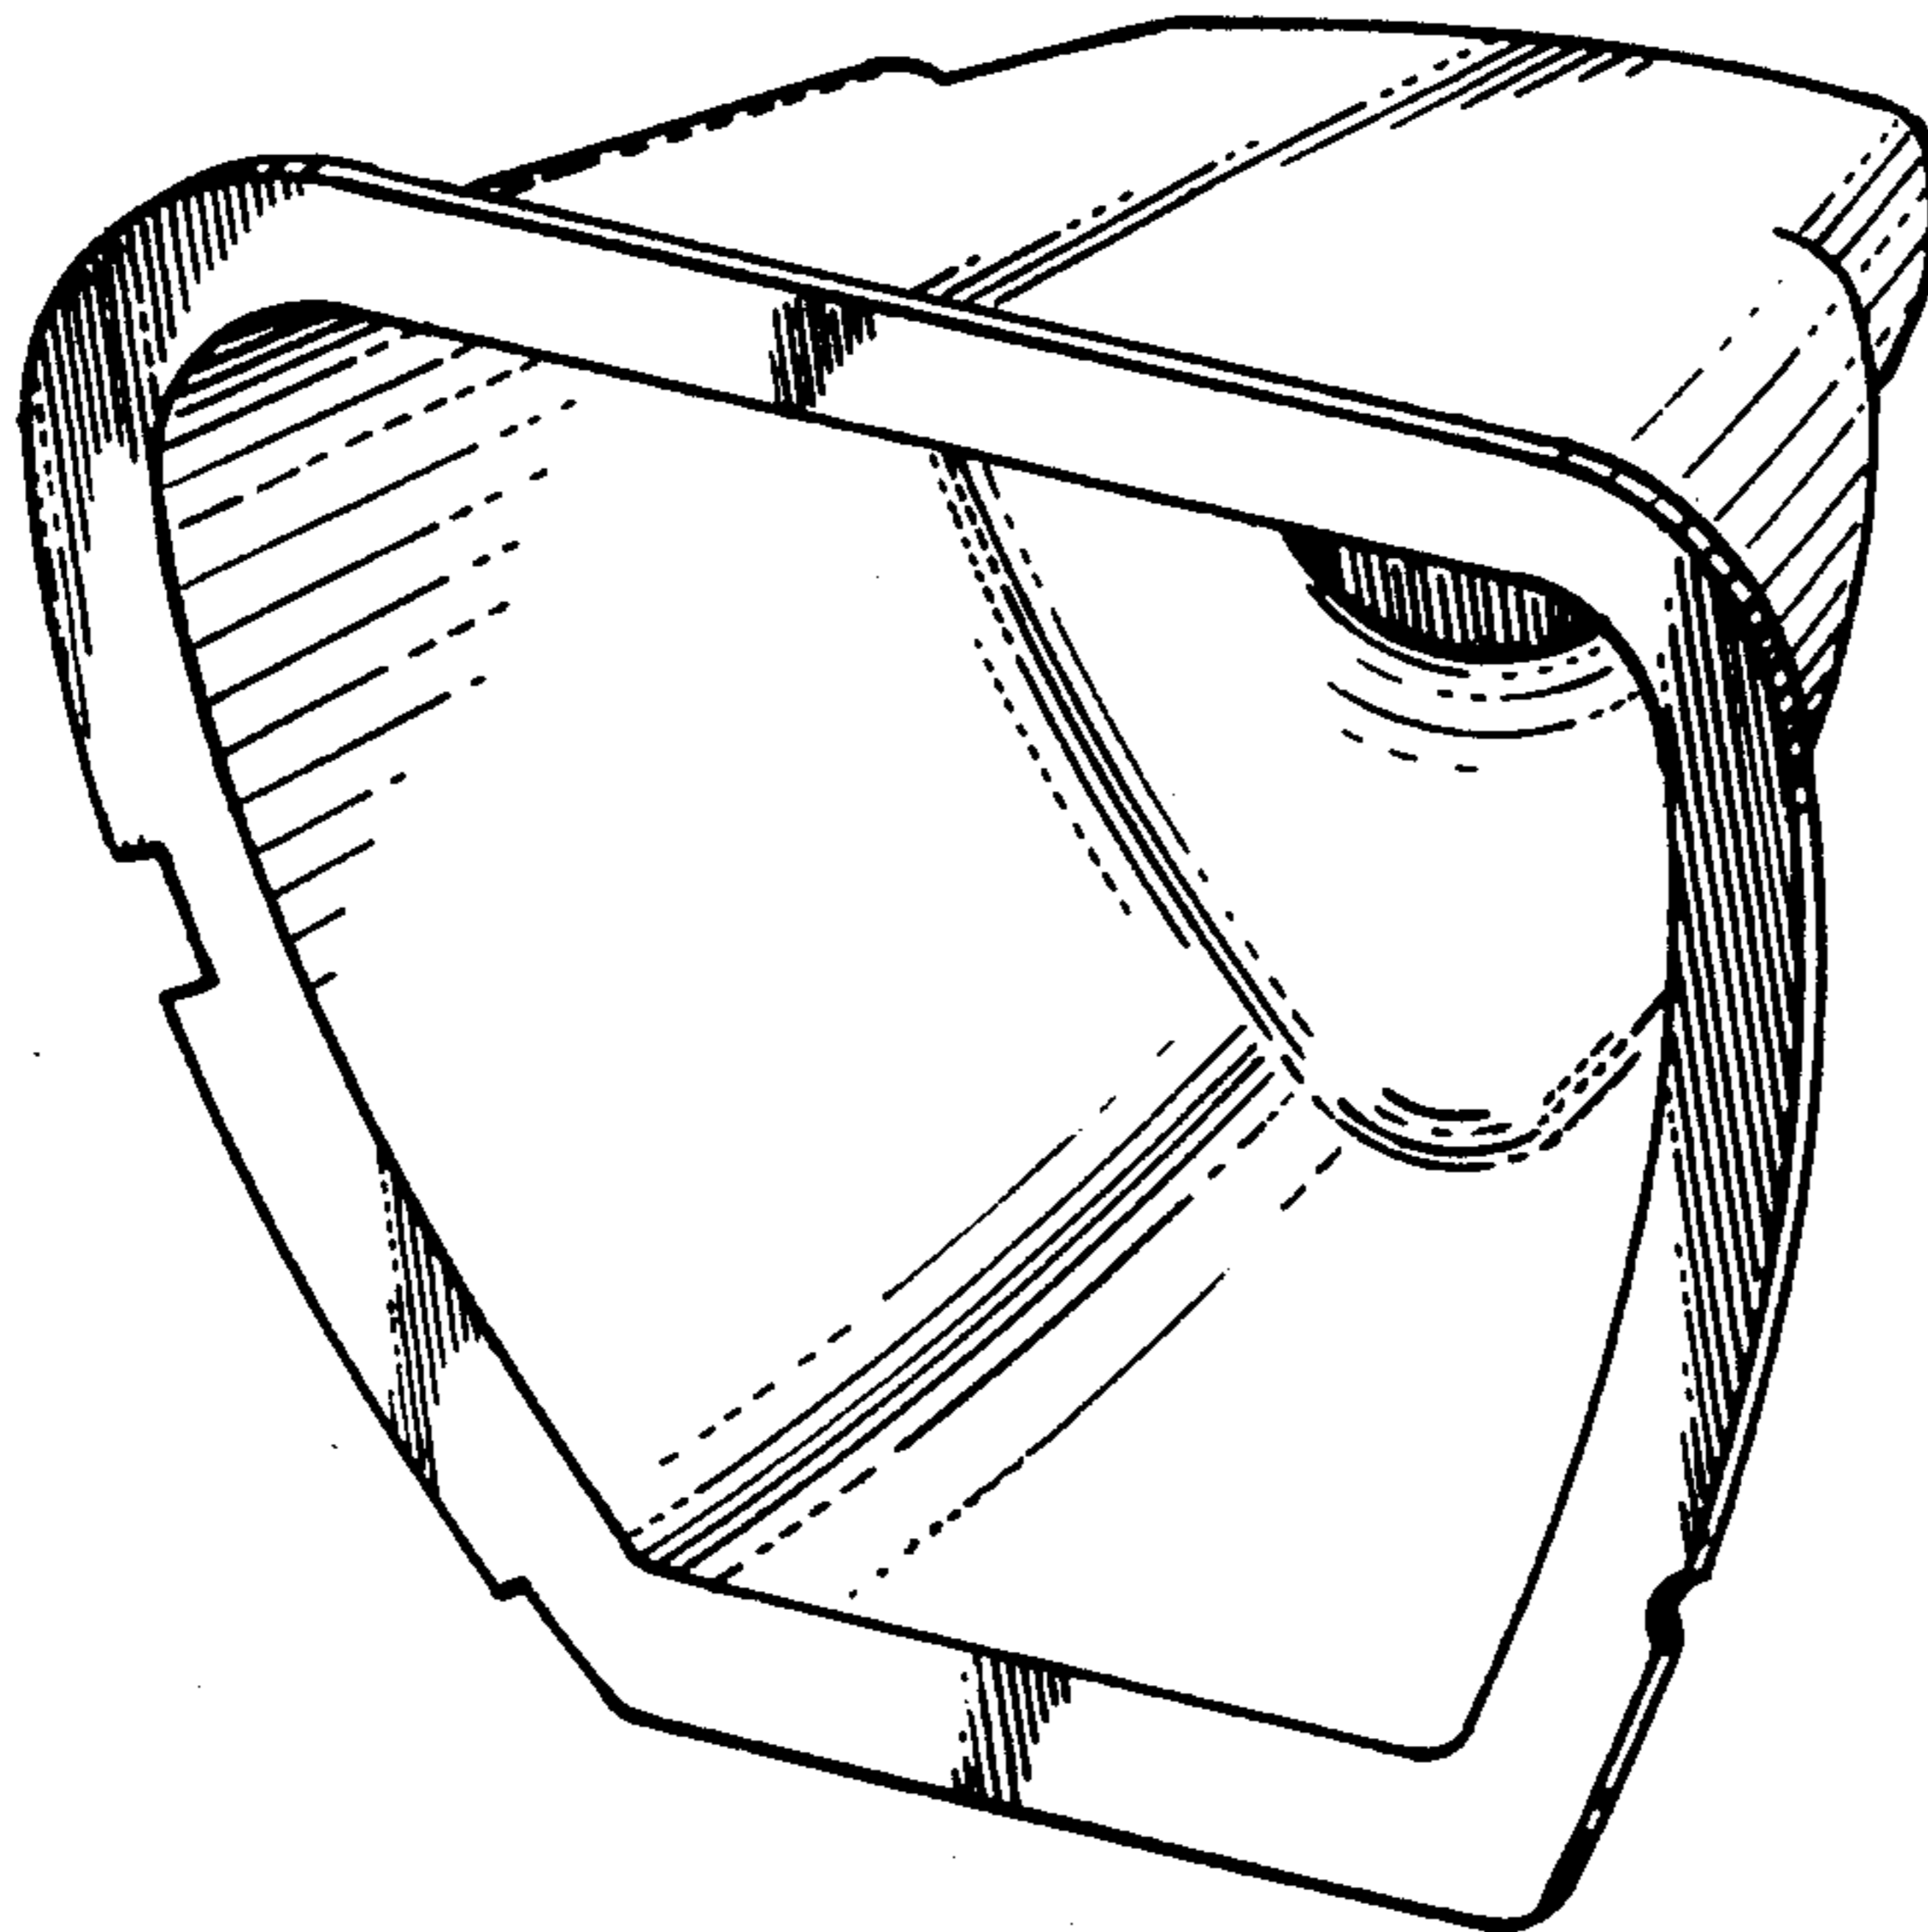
is a front perspective view of a helicopter baggage compartment extension device, showing our new design;
